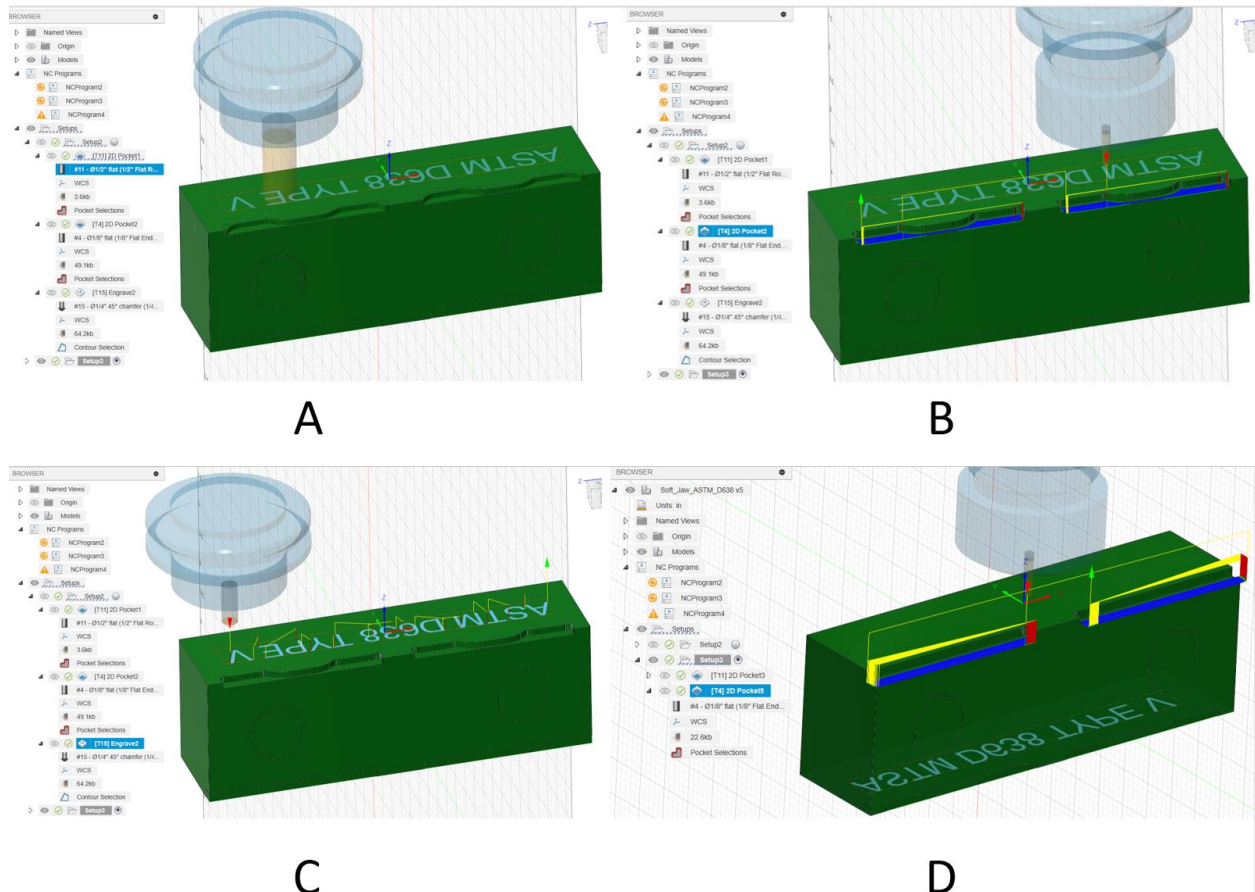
Machining Operations for ASTM D638 Type V Tooling
